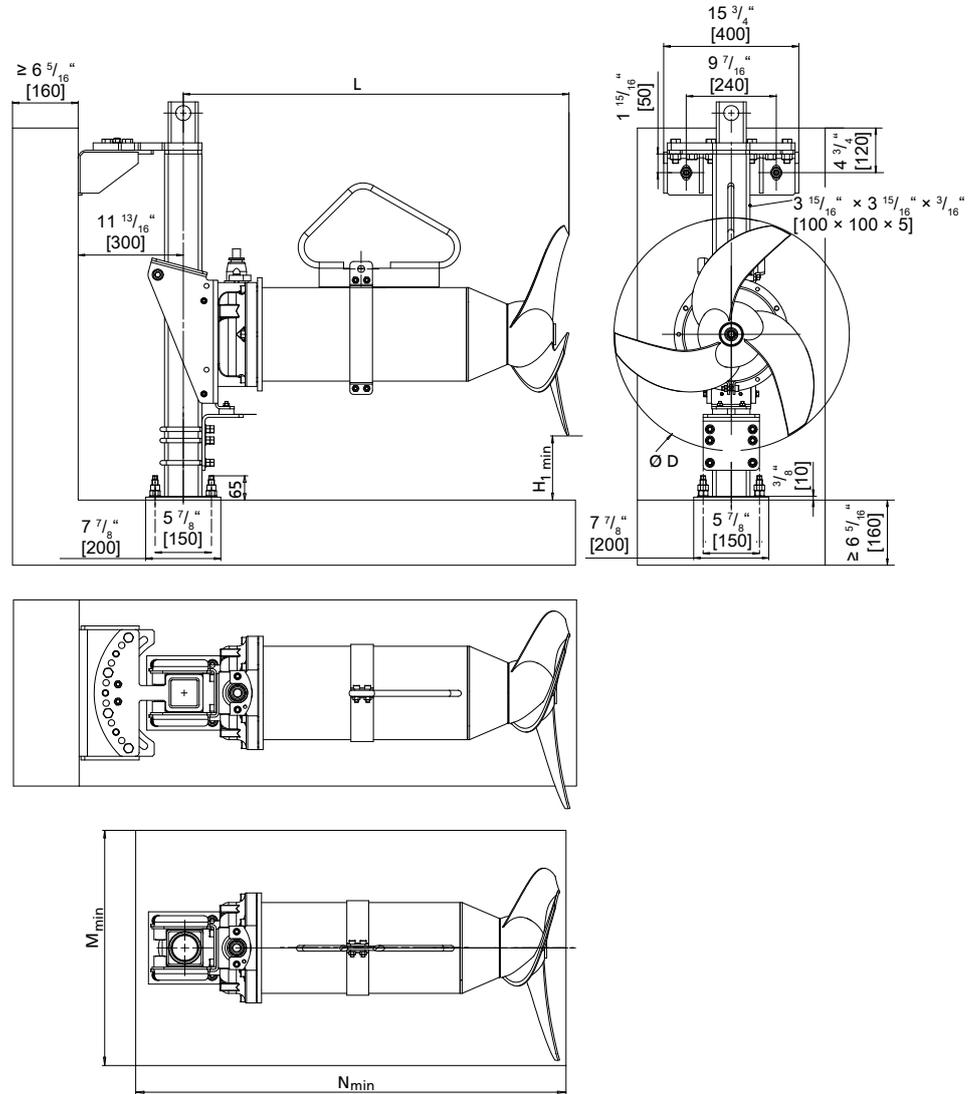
Installation of accessories 22 – Amamix 400 (size 4135 only) / 600
